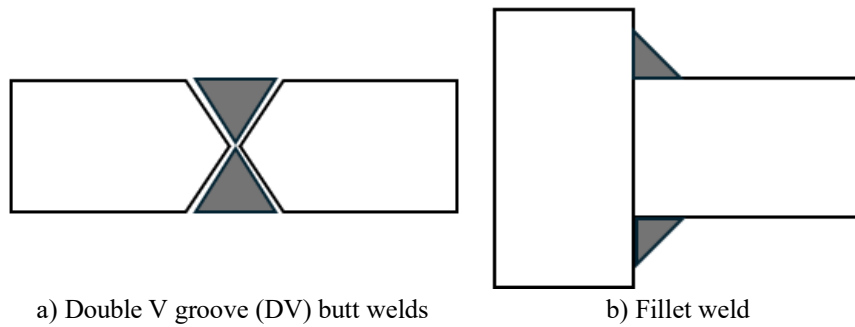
Schematic of the considered weld types, white = the components, grey = added material from welding.
